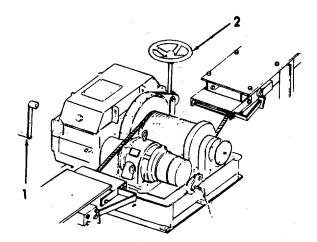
Bow Ramp Machinery and Fittings (Sheet 1 of 2).
